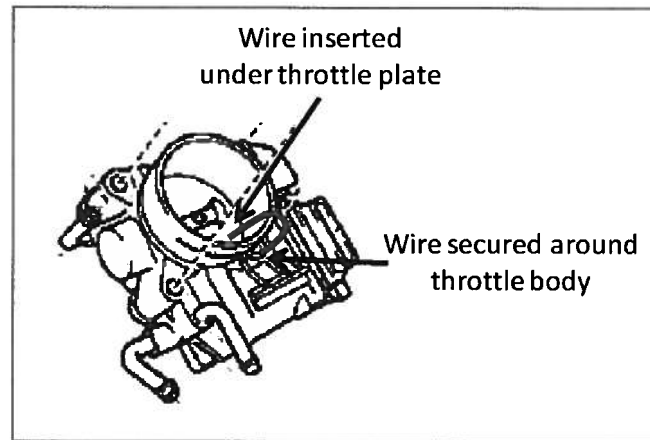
Wire inserted in throttle body to prevent throttle valve from fully closing
